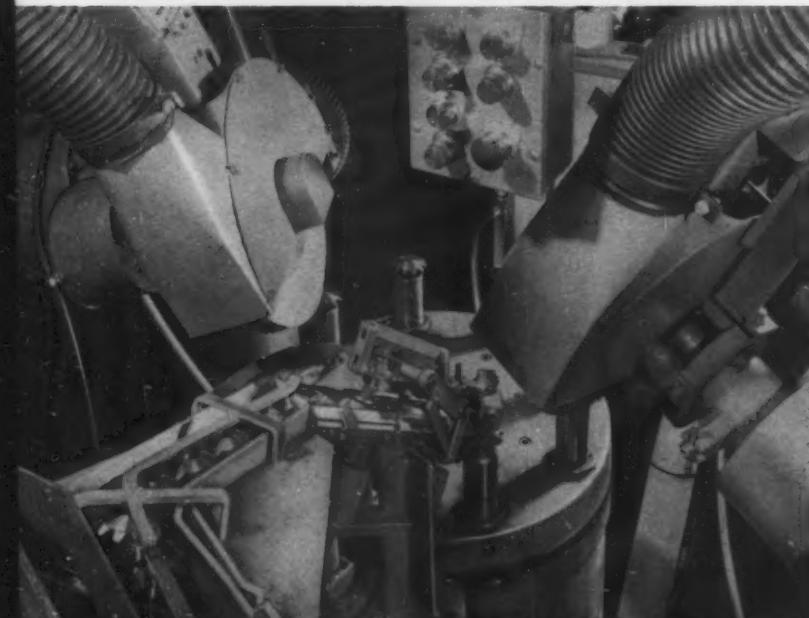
Pinions on conveyor slide down a chute and are automatically loaded on vertical spindles of this rotary-indexing polishing machine.
